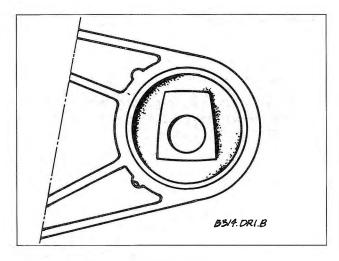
Installed orientation of final drive rubber mounting bushing.
